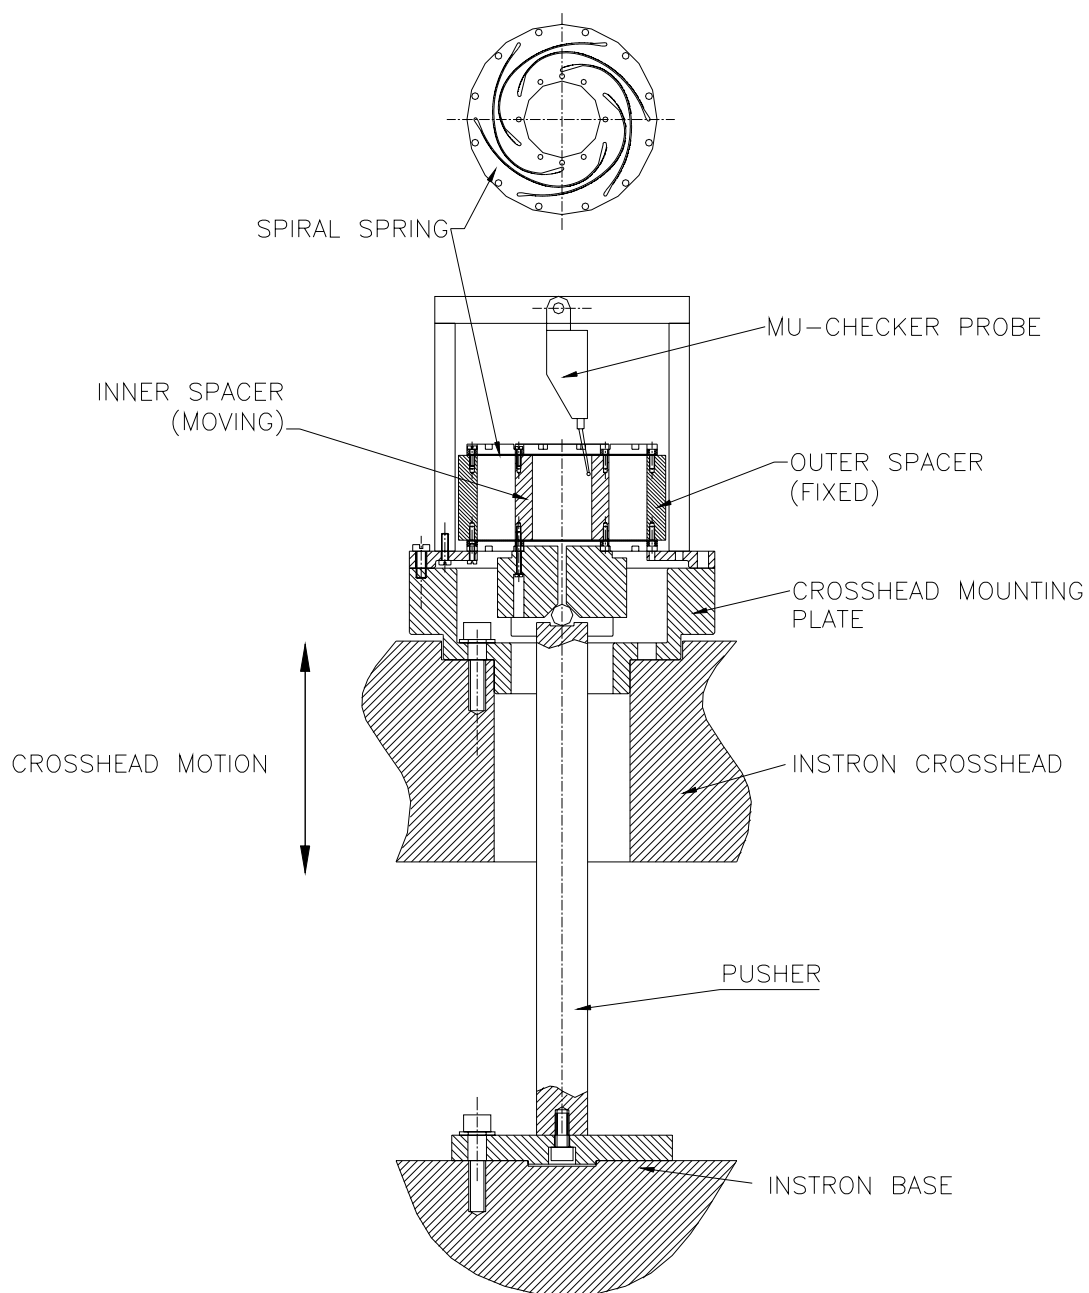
Section Through Simplified Flexure Bearing Assembly.
